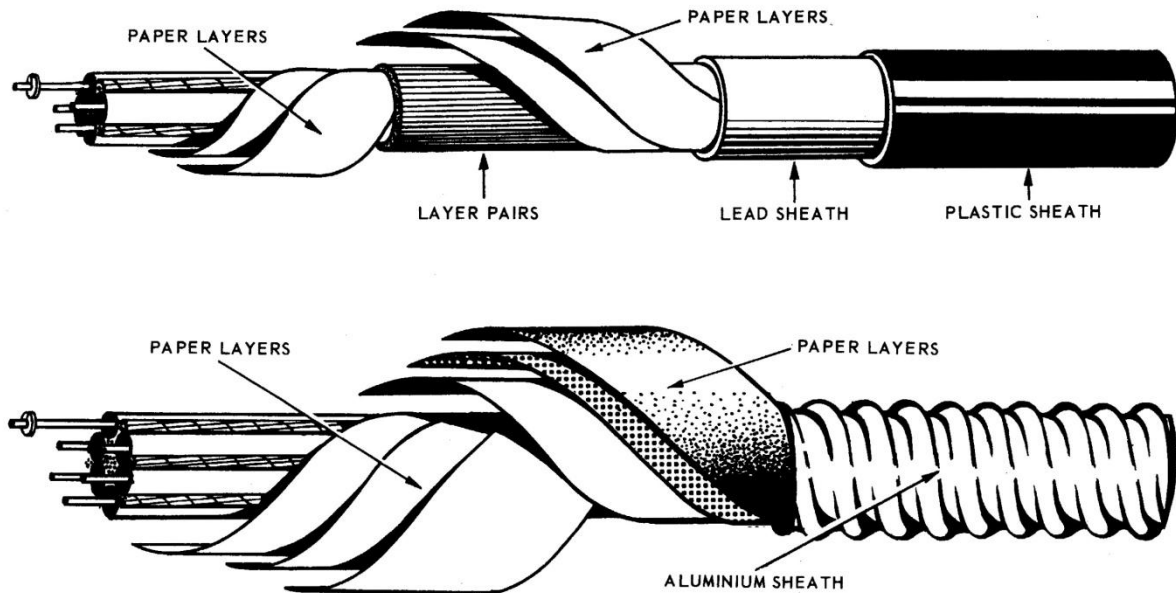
TYPICAL 4 AND 6 TUBE COAXIAL CABLES.
